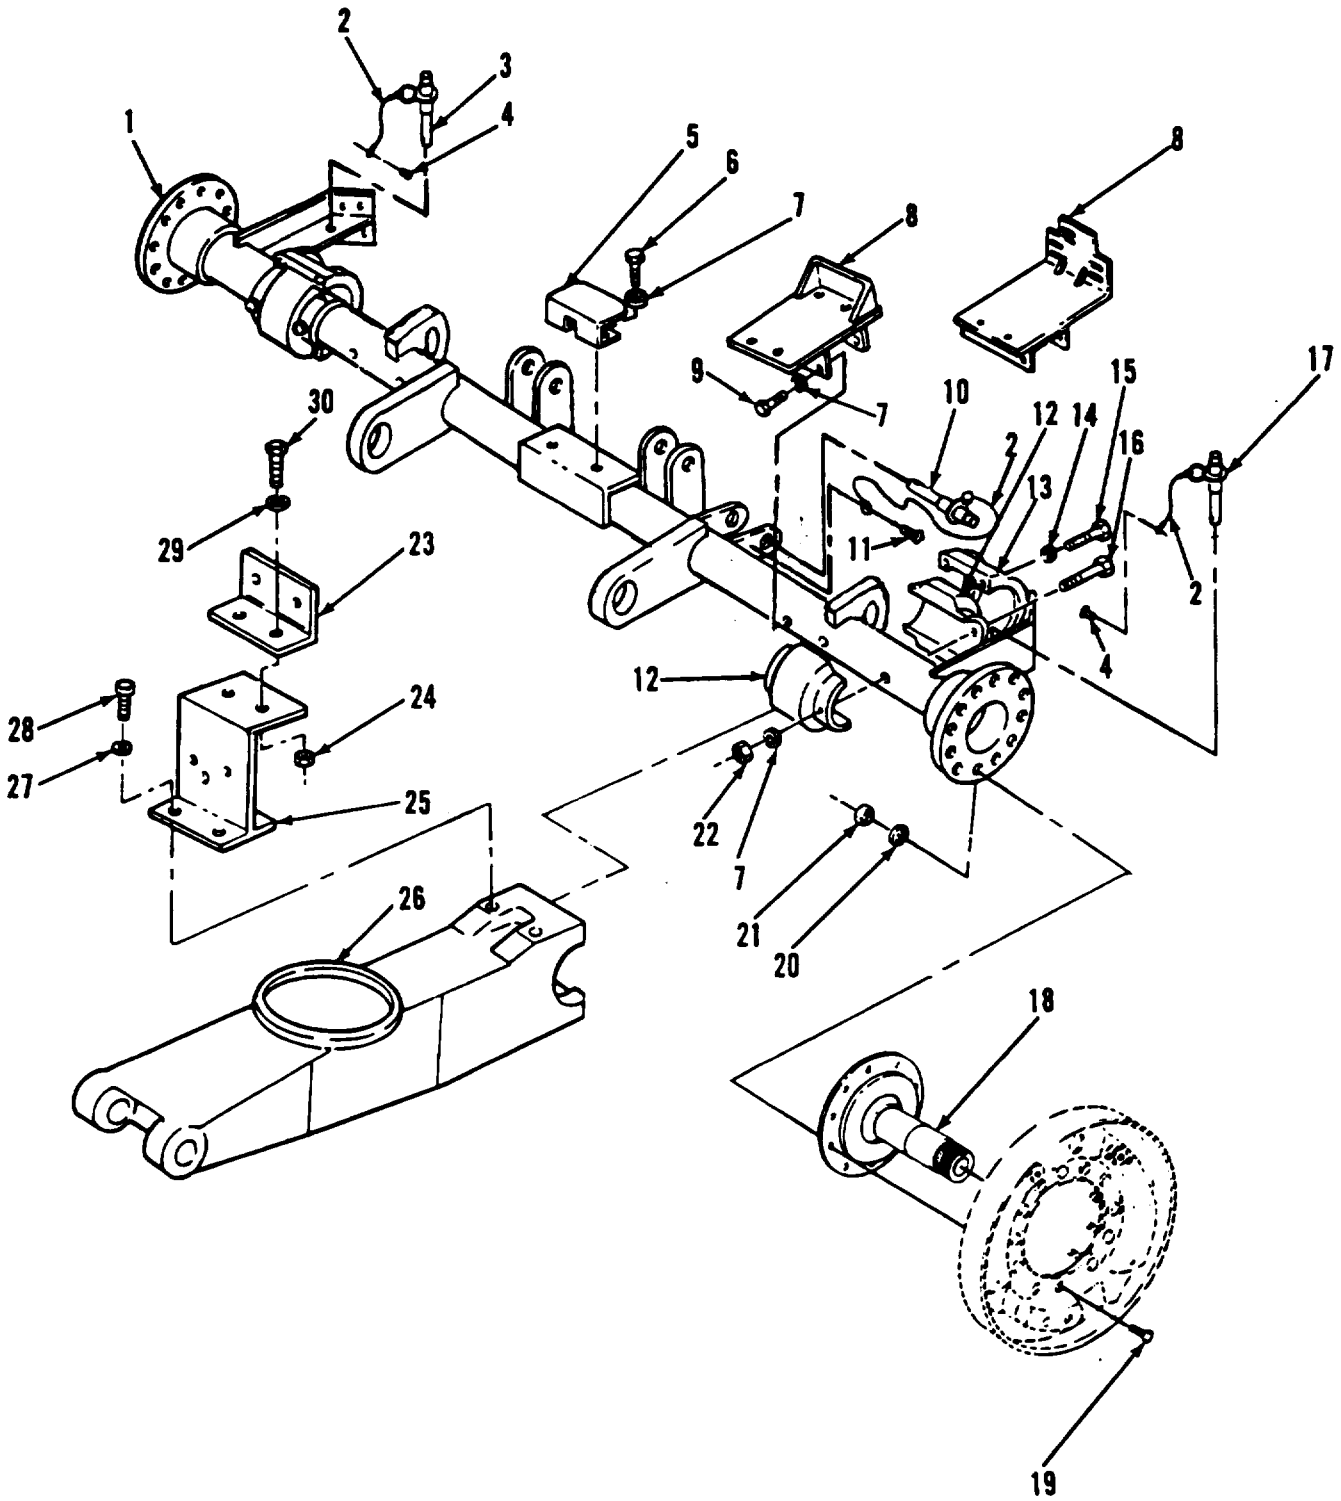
REAR AXLE ASSEMBLY (M832).
